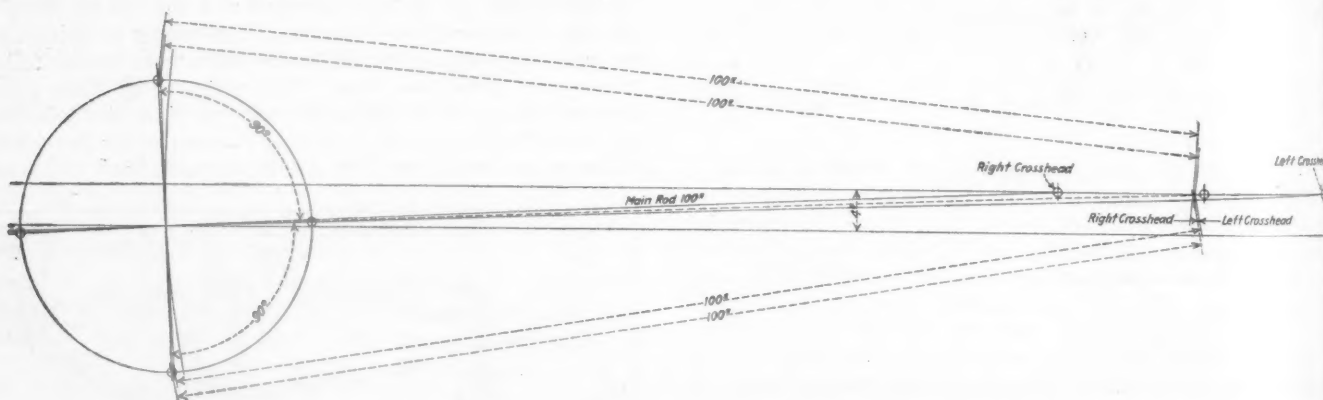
Drawing Showing Irregularity Under Extreme Conditions With Main Rod Only 100 In. Long and Cylinder Centers 4 In. Above Driving Wheel Centers
